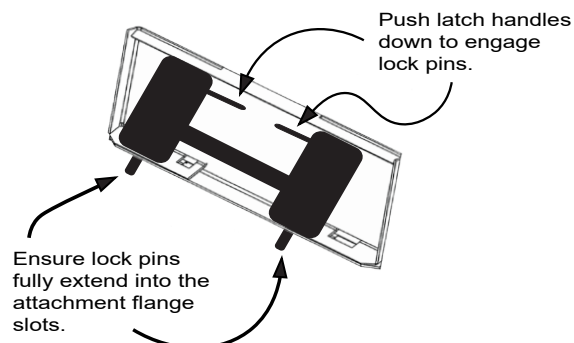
B QUICK ATTACH COUPLER LOCKED TO ATTACHMENT PLATE
